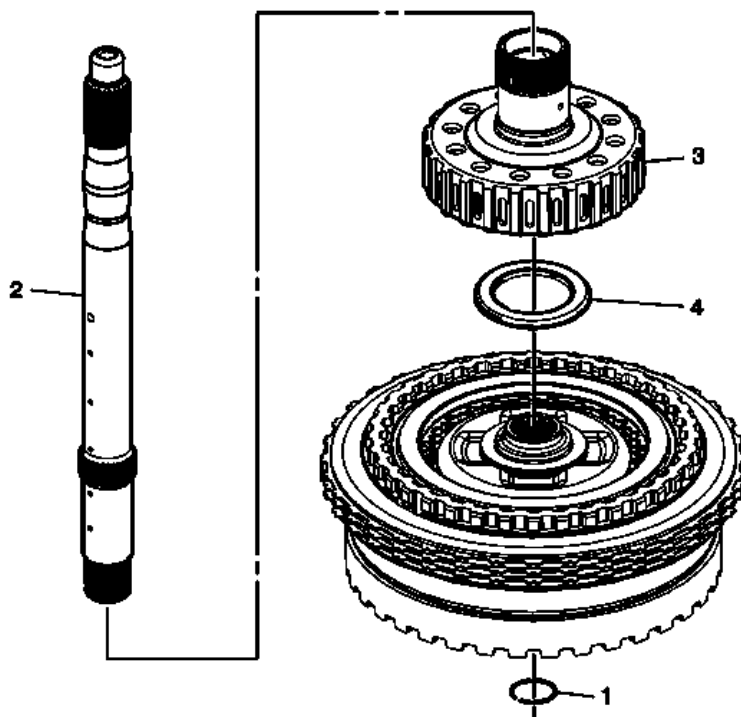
Turbine Shaft, Reluctor Wheel And Piston
